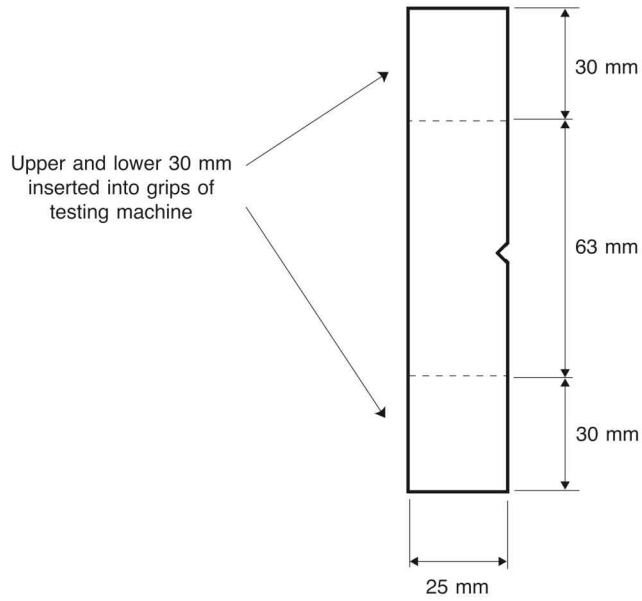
Overall dimensions of SENT specimens. The upper and lower 30 mm were inserted into the grips of the tensile testing machine, resulting in a gauge length of 63 mm.
